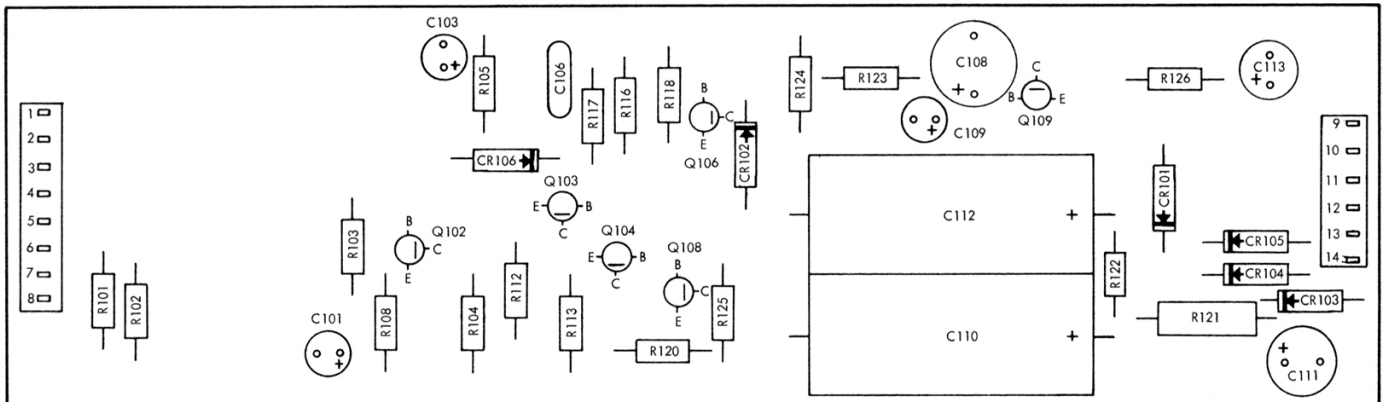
Electronic Part Locations (2D669-1), Mixer Amplifier PCB Assembly
